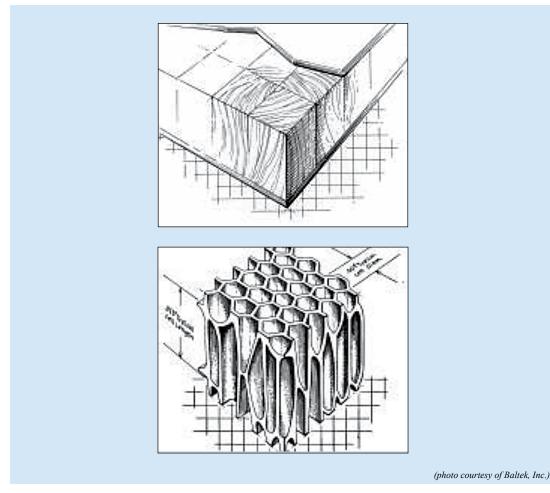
Laminated sandwich construction with balsa wood
